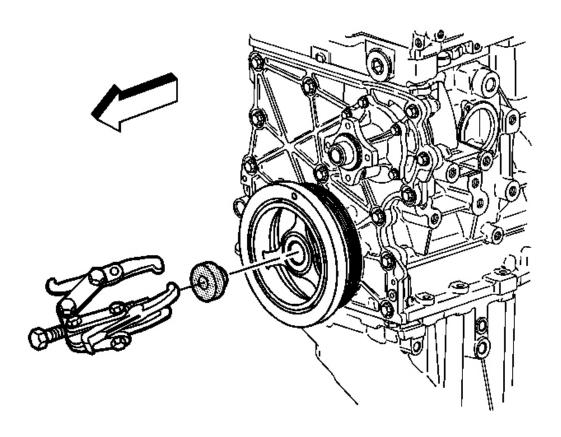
View Of Crankshaft Balancer Courtesy of GENERAL MOTORS CORP.
